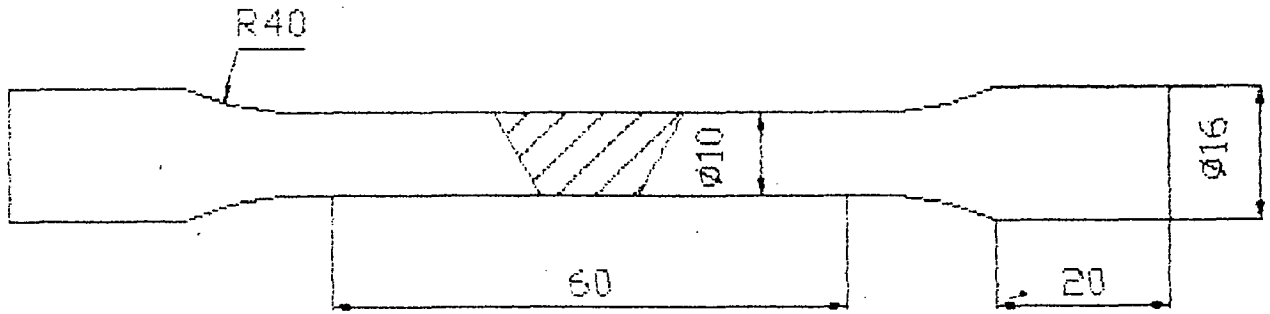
DIAGRAM SHOWING THE DIMENSIONS OF TENSILE SPECIMEN
